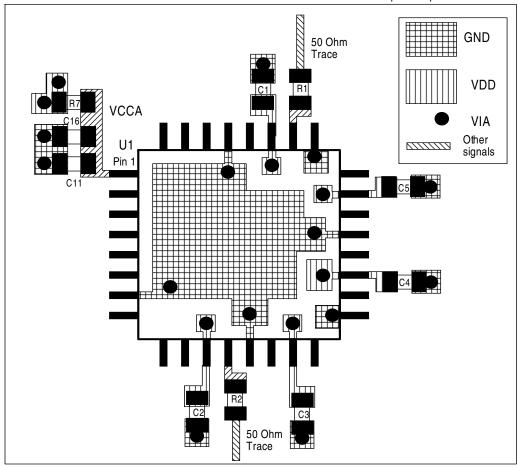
B. PCB BOARD LAYOUT FOR ICS86953I
